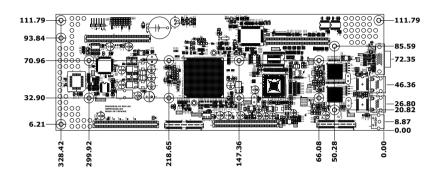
I/O Board Dimensions of the PEAK 8920VL2
